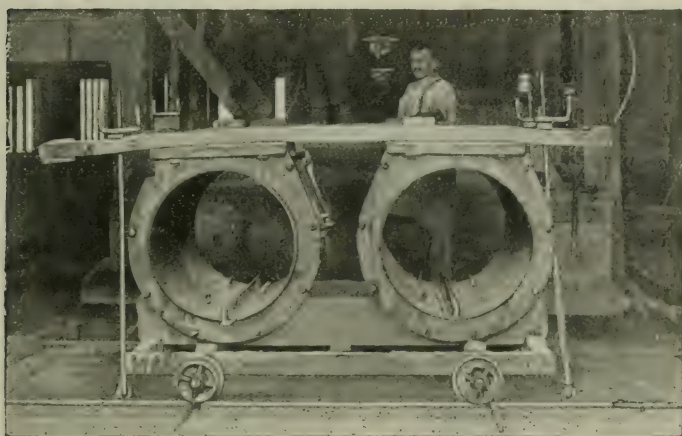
"Jagger" Vibrating Table, with Two Moulds for Concrete Tubes.
